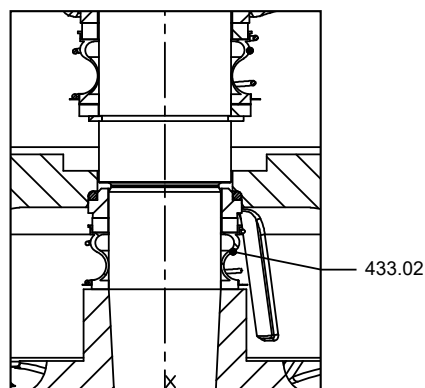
Pump-end mechanical seal (bearing brackets S01 - S07)
